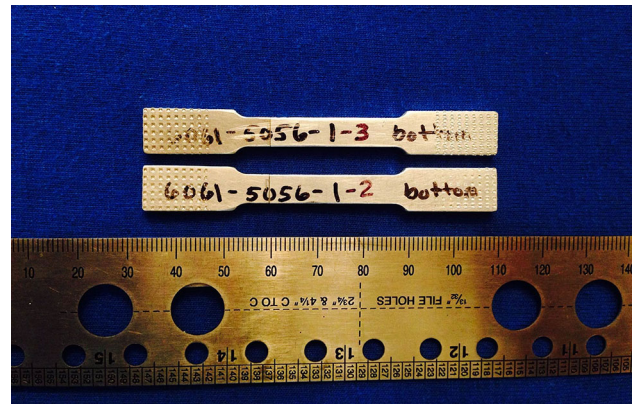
Flat tensile specimens machined from the completed dissimilar material joint between Cast ZE41A-T5 Mg to Wrought 6061-T6 Al using cold spray 5056 Al as the transitional layer
